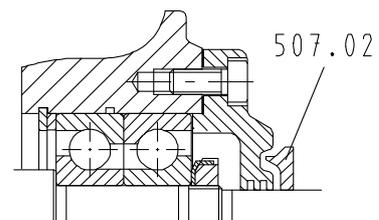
General assembly drawing for bearing bracket designs P02 - P06
